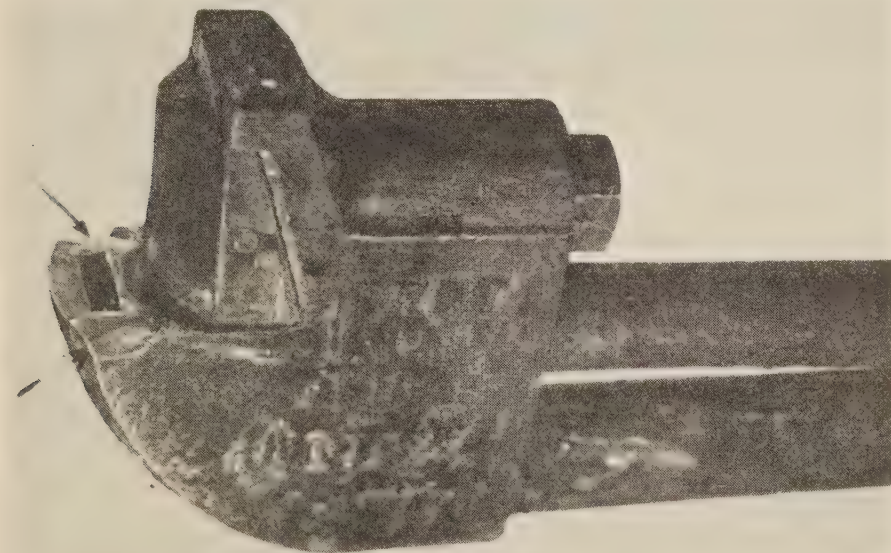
VIEW SHOWING EROSION AT OUTER EDGES OF THE TIPTABLE OF STEAM-ATOMIZING BURNER FROM USE OF COAL-IN-OIL FUEL
